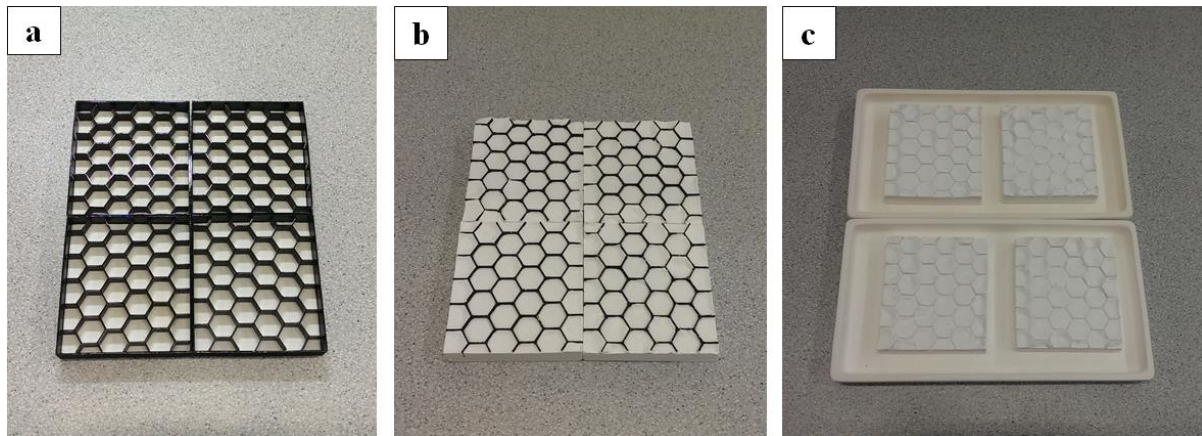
The dense Al₂O₃/porous Al₂O₃ composites manufacturing; a) 3D printed PLA frame and insert, composites after slip casting of dense layer, c) composites after burn up of 3D printed parts.
